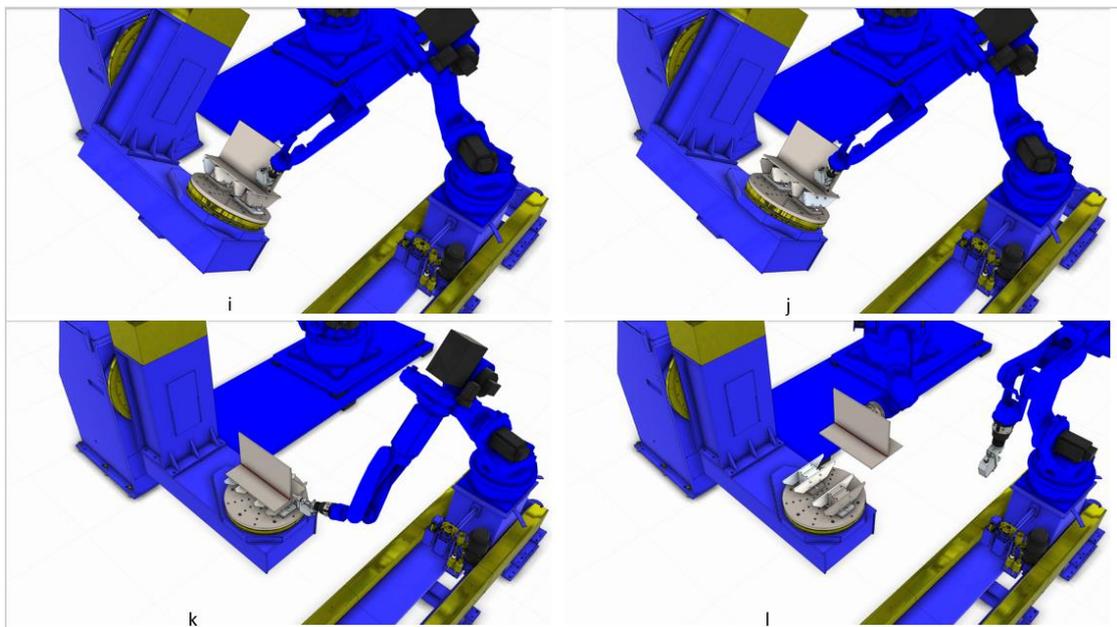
Phases of simulation continues. I) welding of workpiece, j) welding of workpiece from other side, k) inspection of the joint geometry and l) removal of the finished workpiece.
